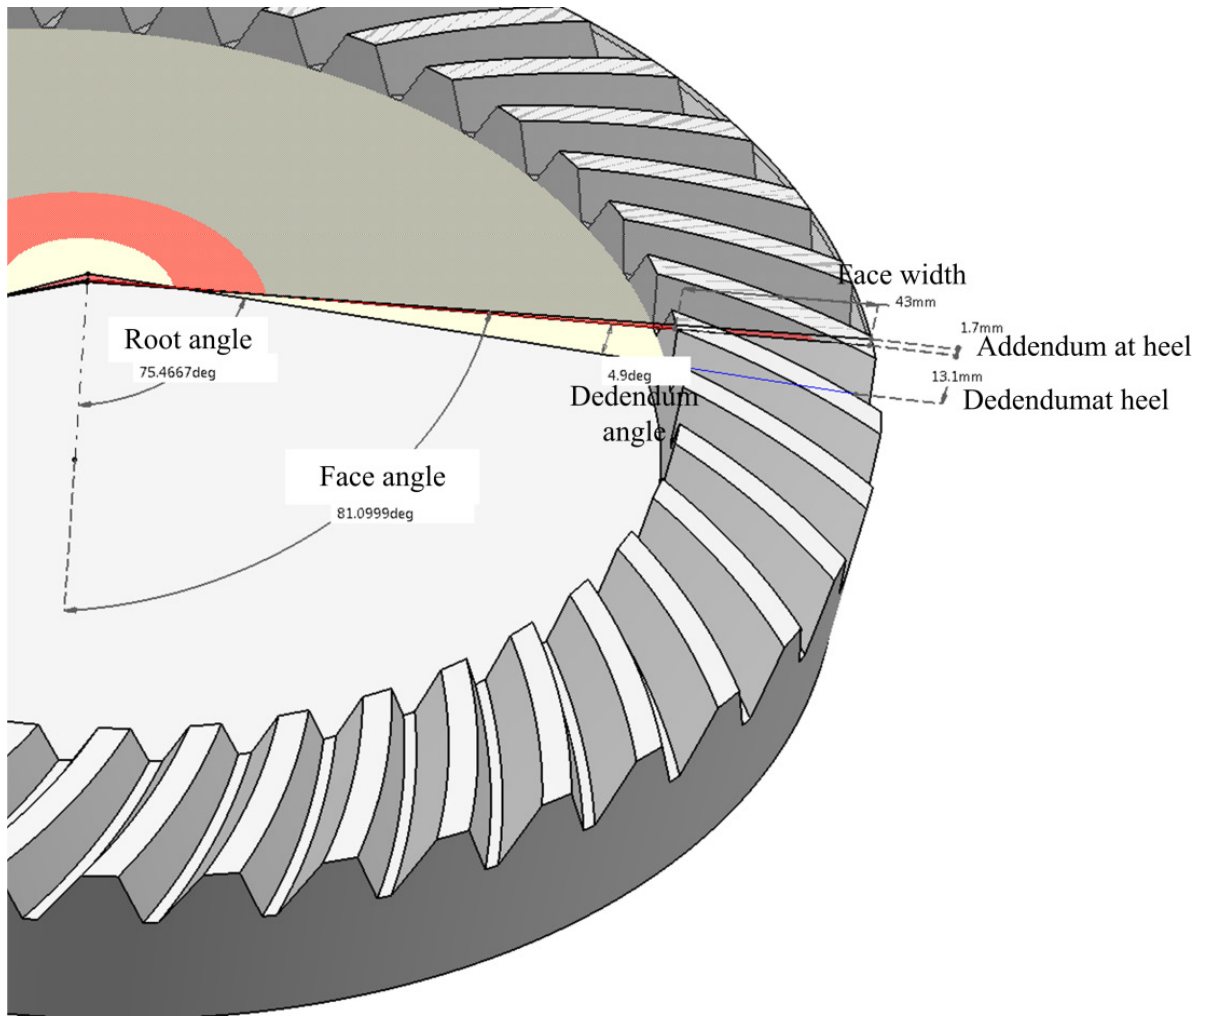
Gear blank parameters measured on a virtually machined hypoid gear using a CAD/CAM software.
